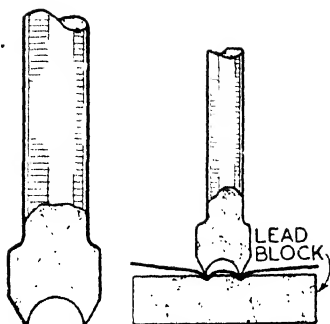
HOLLOW PUNCH FOR CUTTING OUT ROUND HOLES
